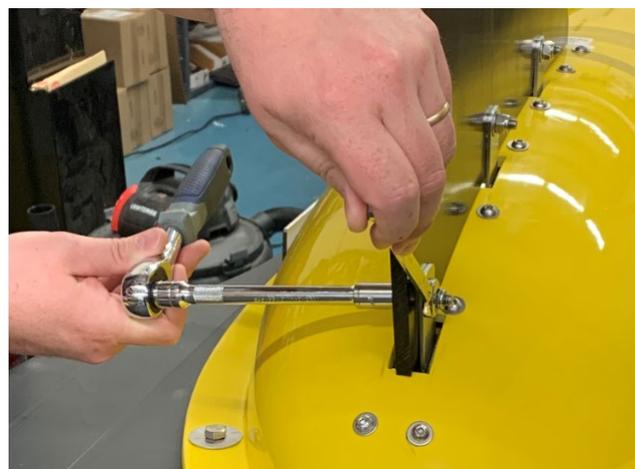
Tail Rudder Bolt Hardware Disassembly
